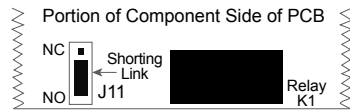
(b) Jumper J11 on the PCB in "NO" condition (Default)
